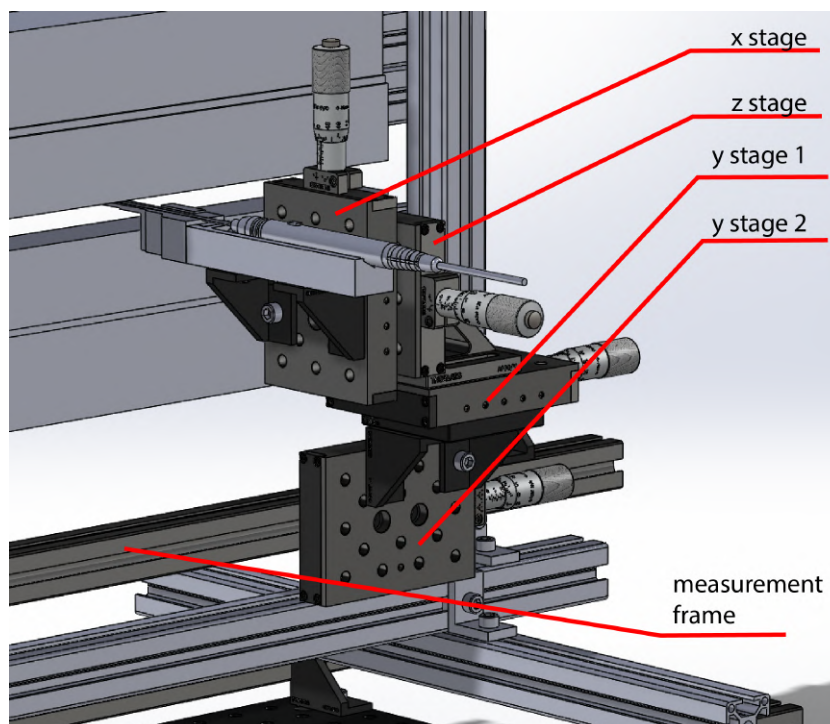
Render of the manual stage assembly used to move the sensor probe through the airgap.
